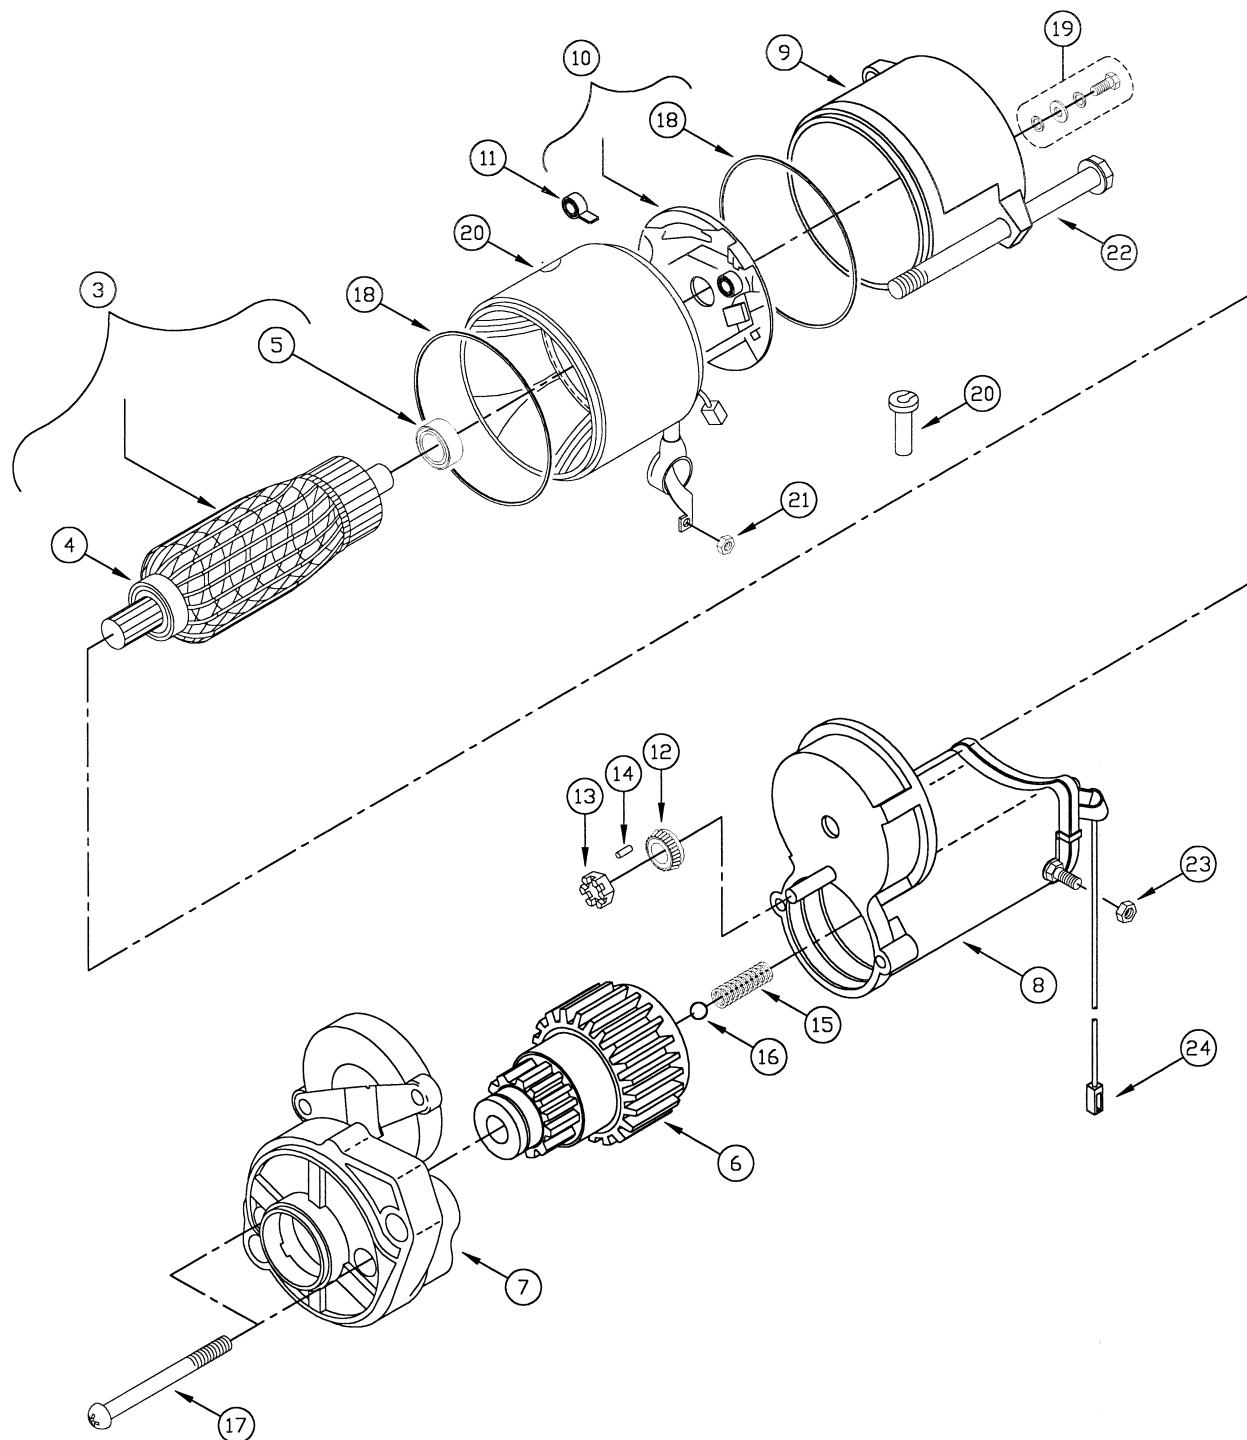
Starter (Component Parts-B), Engine Group
